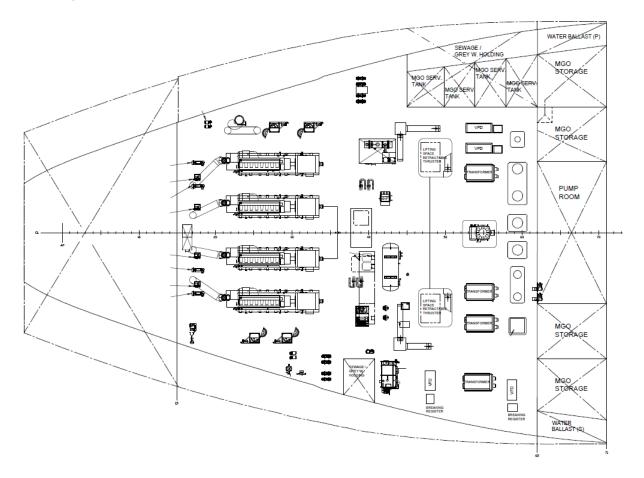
Existing engine room installation of pilot study ship (Courtesy: Brevik Engineering)
